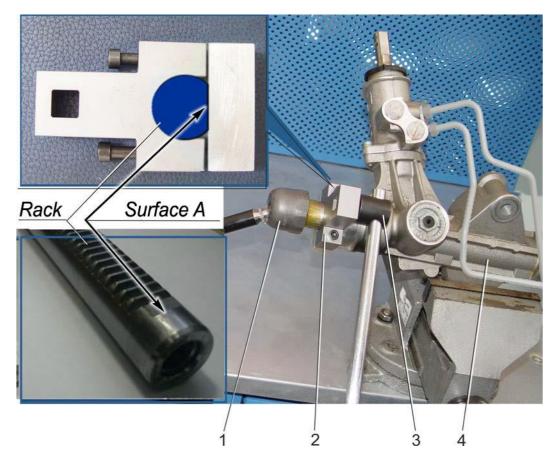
Tool for mounting and dismounting the inner pivot assembly with rod: 1 - internal ball pivot; 2 - mounting and dismounting tool for internal pivot assembly with a rod; 3 - tap wrench; 4 - steering gear
